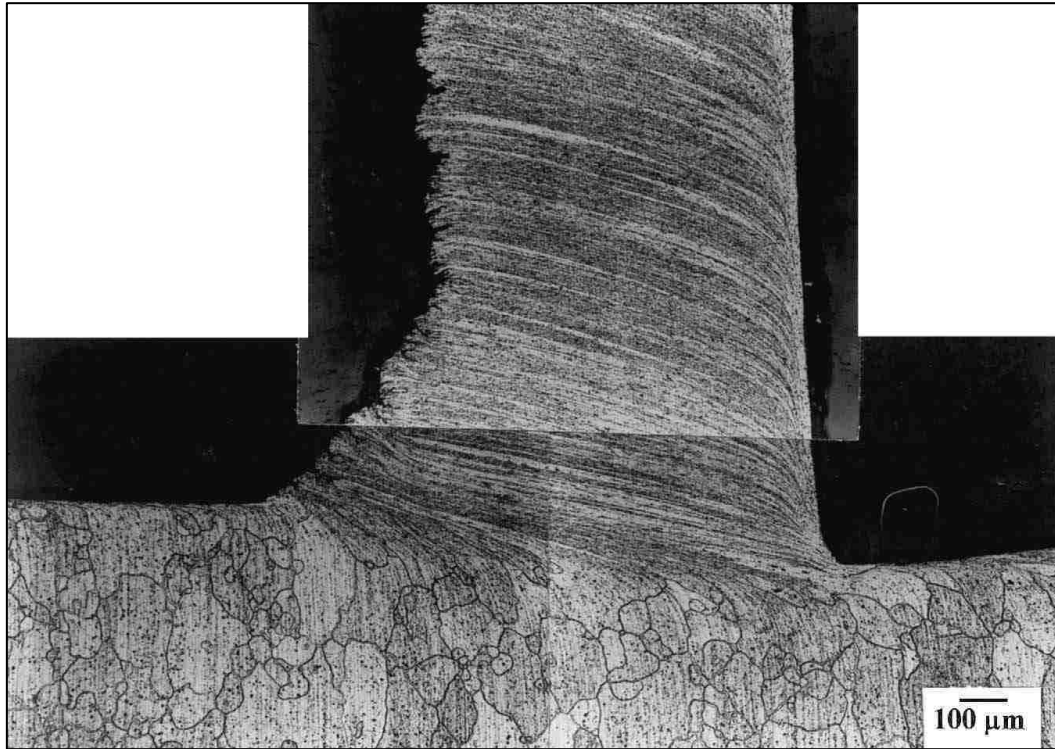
Optical micrograph of a section through a machined chip of 6061 Al attached to the work piece. Cutting speed = 0.6 m/s, feed = 0.30 mm, rake angle = -5° [20].
